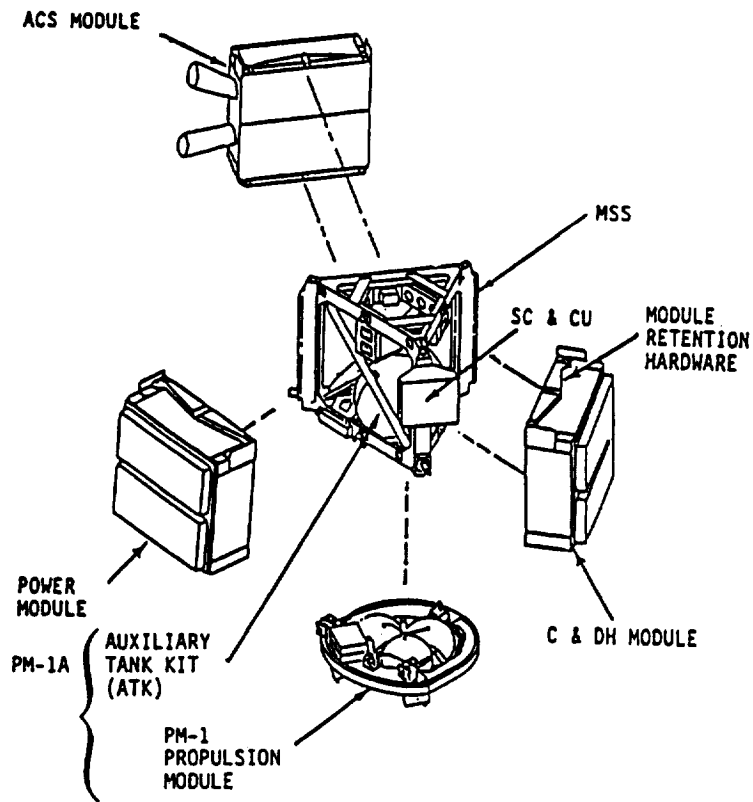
Exploded view of the Multimission Modular Spacecraft.
